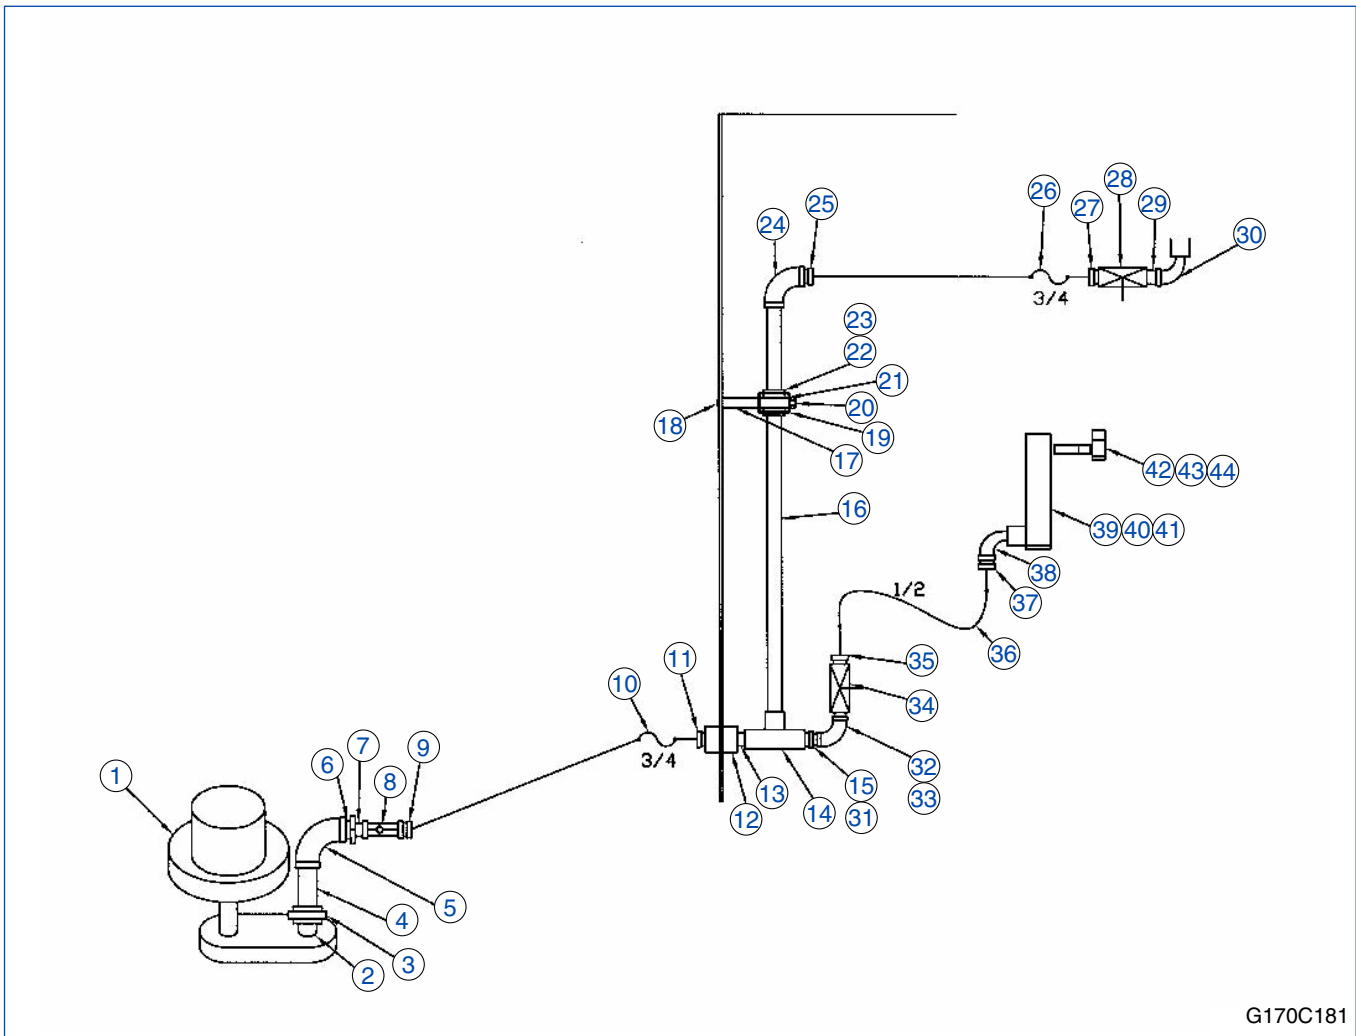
E – COOLANT PIPING SCHEMATIC (PAPER BED FILTER W/MAGNETIC SEPARATOR)
